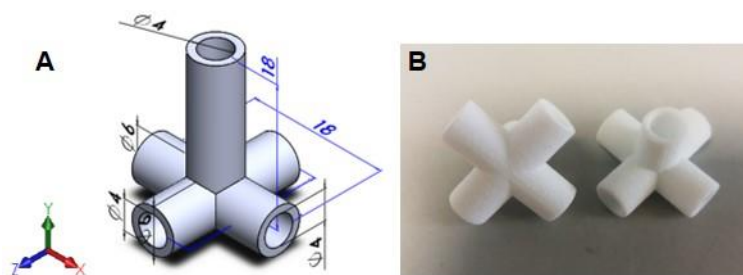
4-opening inlet with 4 mm inner diameter. (A) 3D CAD model with dimensions in mm. (B) Fabricated model in nylon polymer through selective laser sintering.
